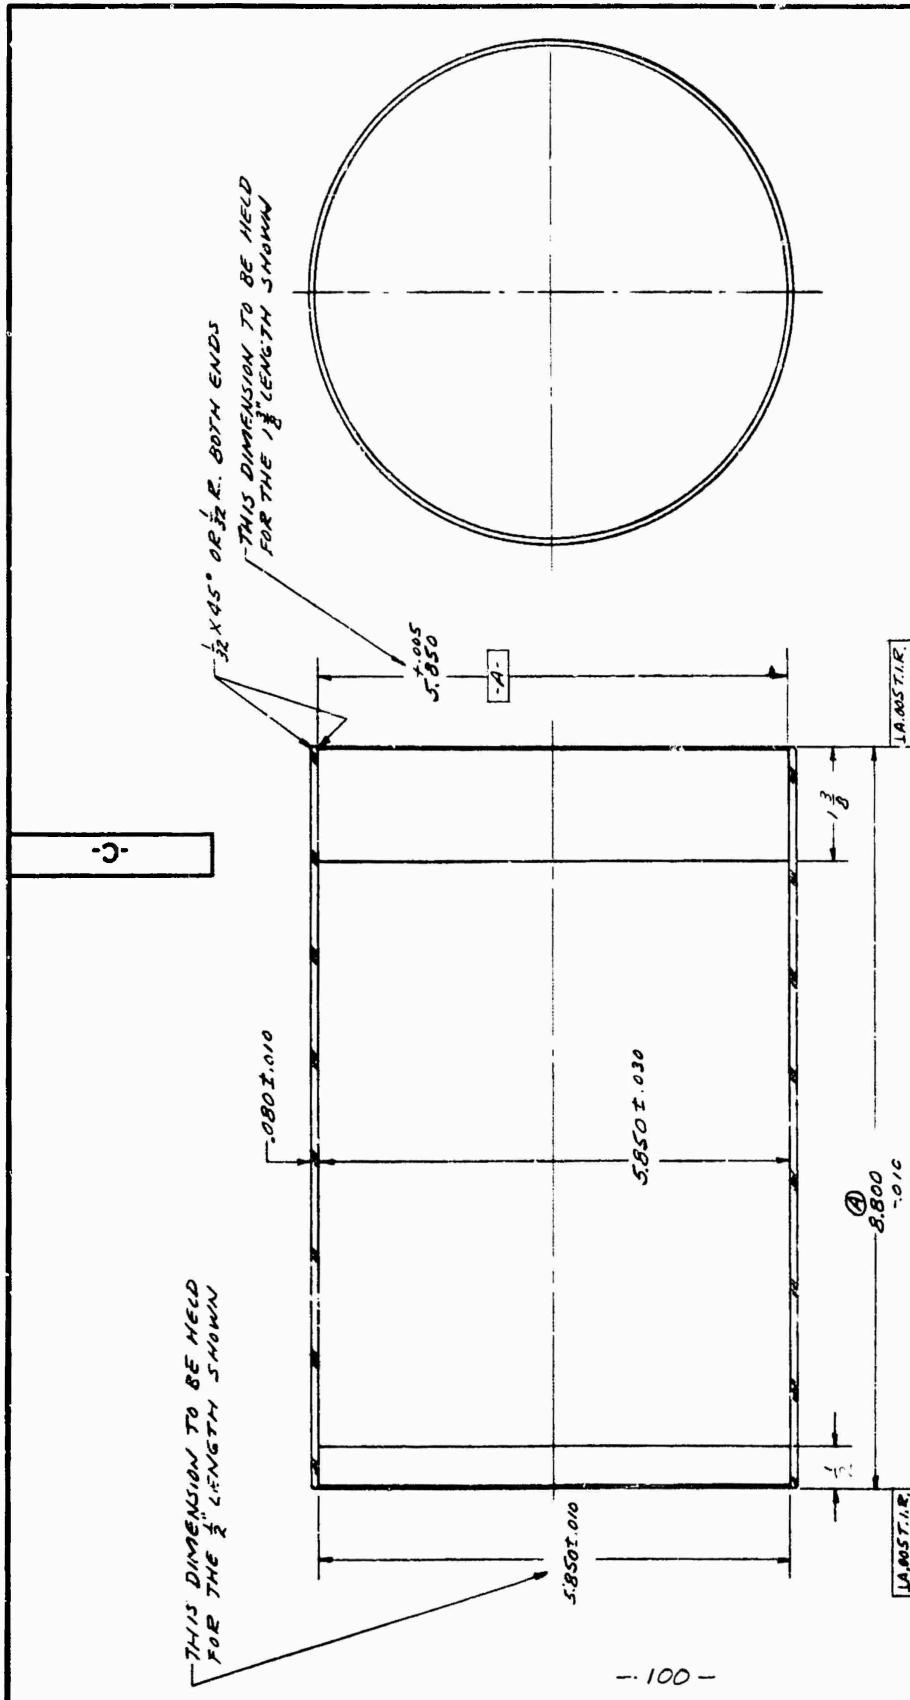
STRAIGHT WALL CARTRIDGE CASE - C.080 IN. WALL
